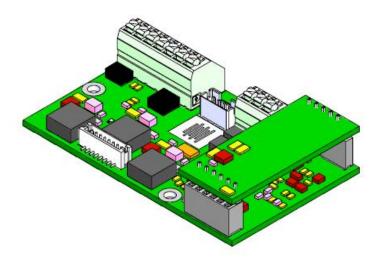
DMX 512-A card plugged in to 0-10V driver board
